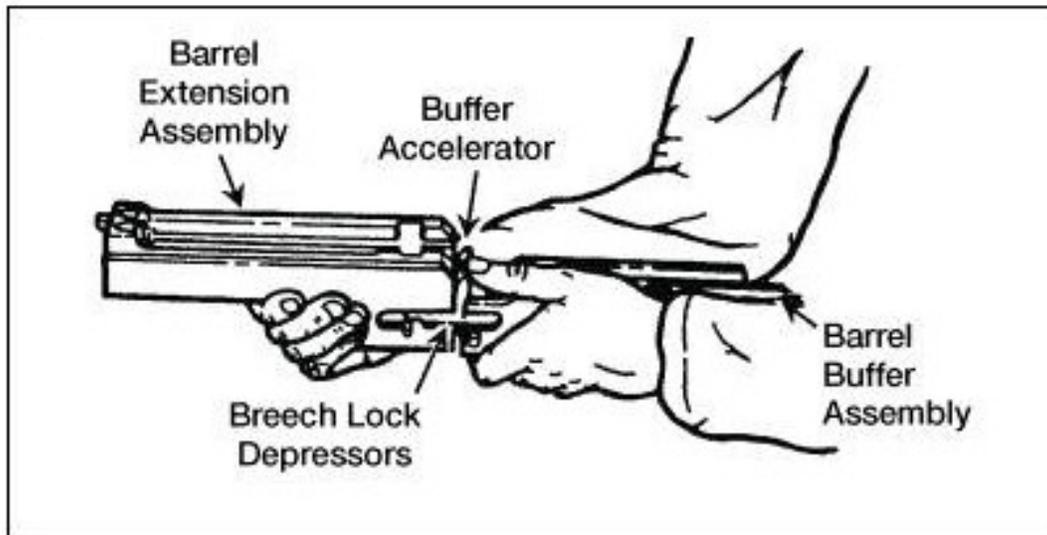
ST-1025_28 (Attachment of the barrel buffer and barrel extension assemblies)
